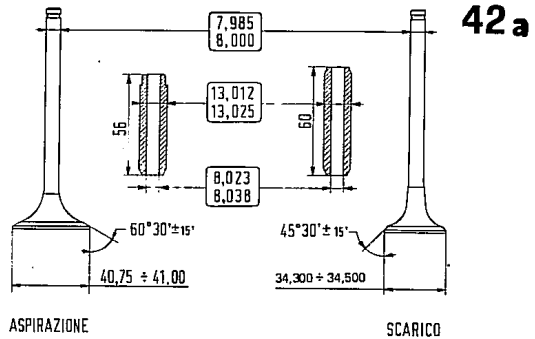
Critical dimensions of intake and exhaust valves and valve guides.
